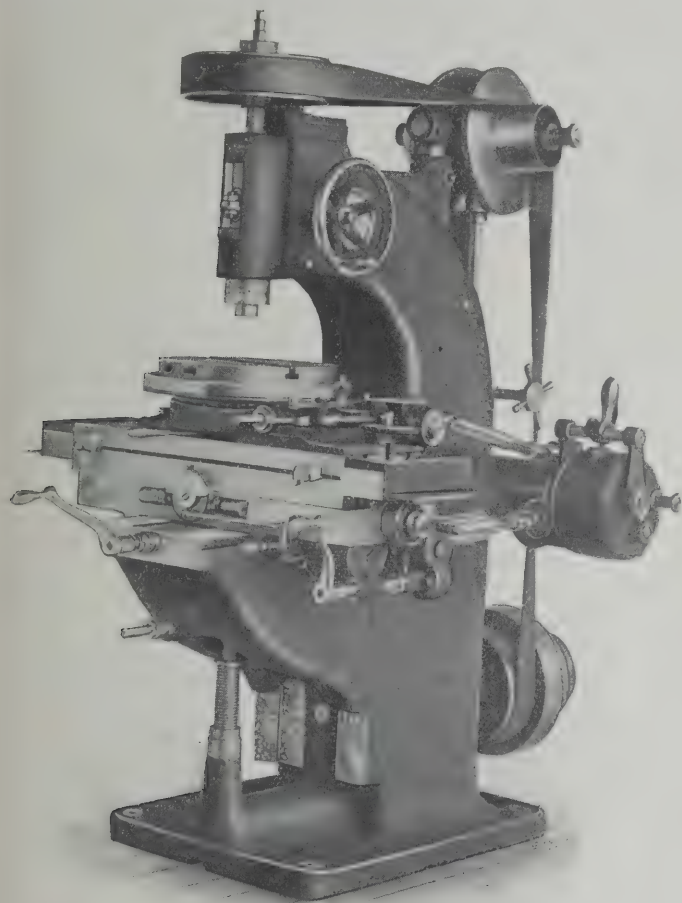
Becker Milling Machine with Improved Rotary Milling Attachment
